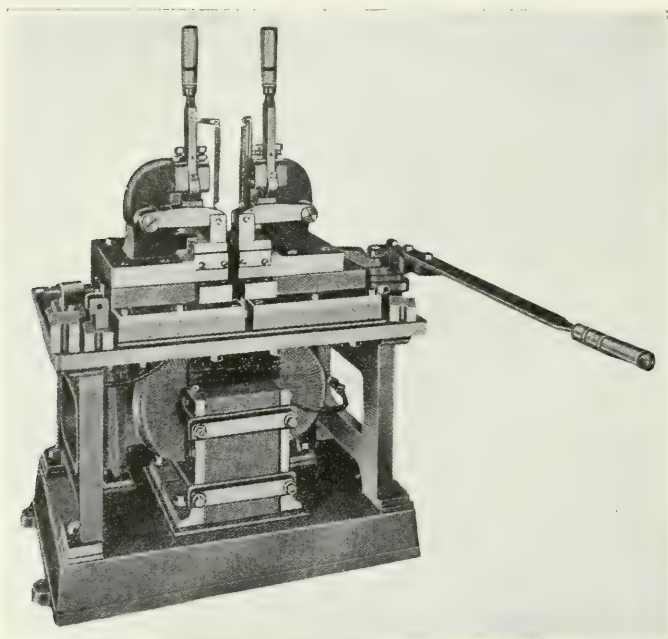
ELECTRIC WELDER FOR CARRIAGE TIRES
